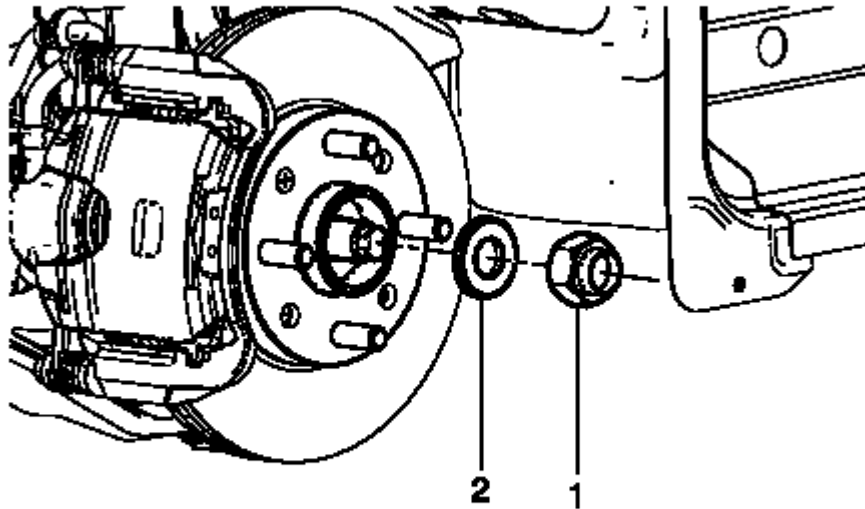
Wheel Drive Shaft Retaining Nut And Washer
